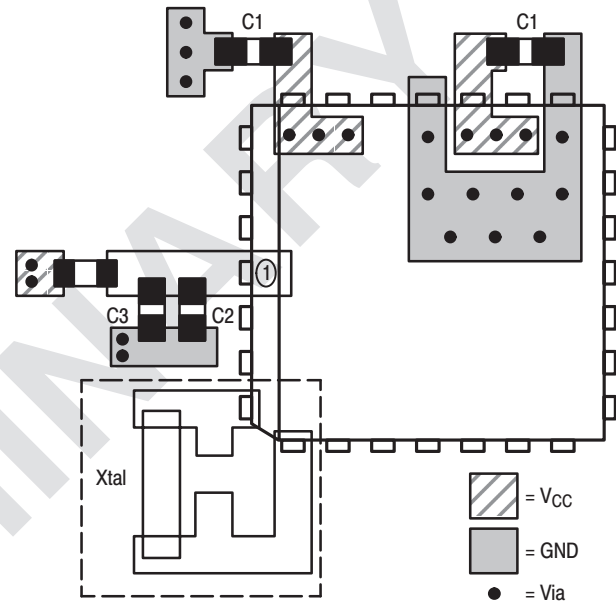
PCB Board Layout Recommendation for the PLCC28 Package
